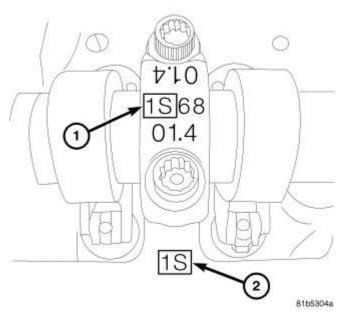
Front Camshaft Bearing Journal Courtesy of CHRYSLER LLC
